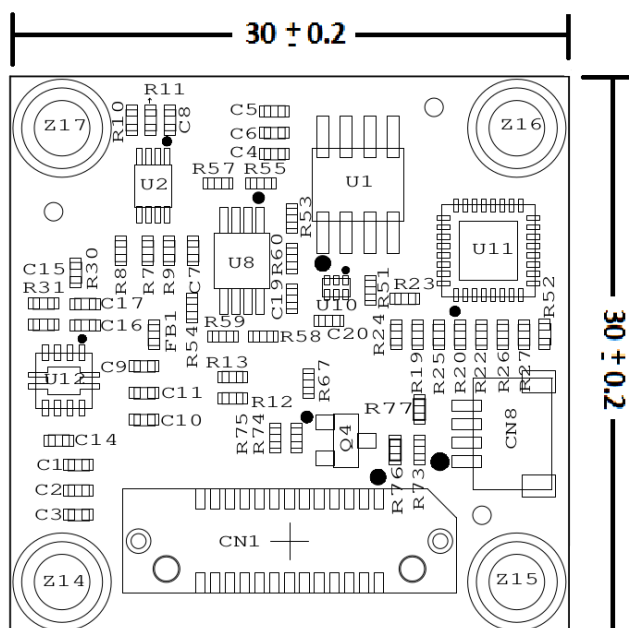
Front View of e-CAM24_CUNX Adaptor Board Mechanical Dimensions
